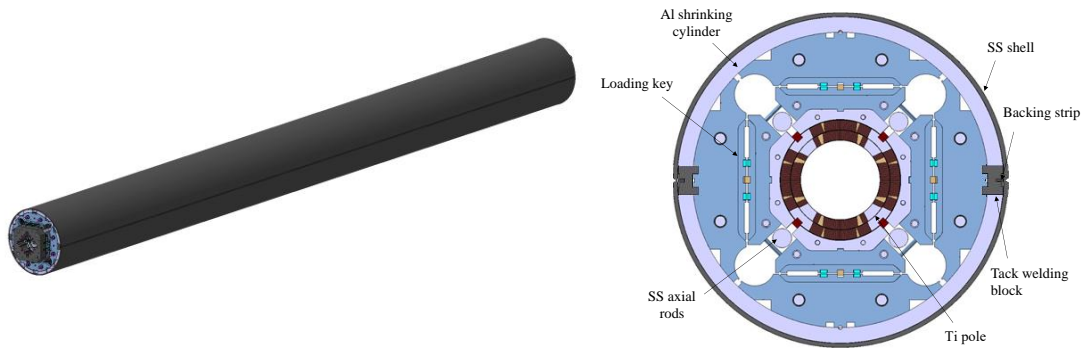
View of MQXFB magnet including axial support system and stainless-steel shell (left). Cross section of the MQXF magnet including stainless steel shell, backing strip and tack welding blocks.
